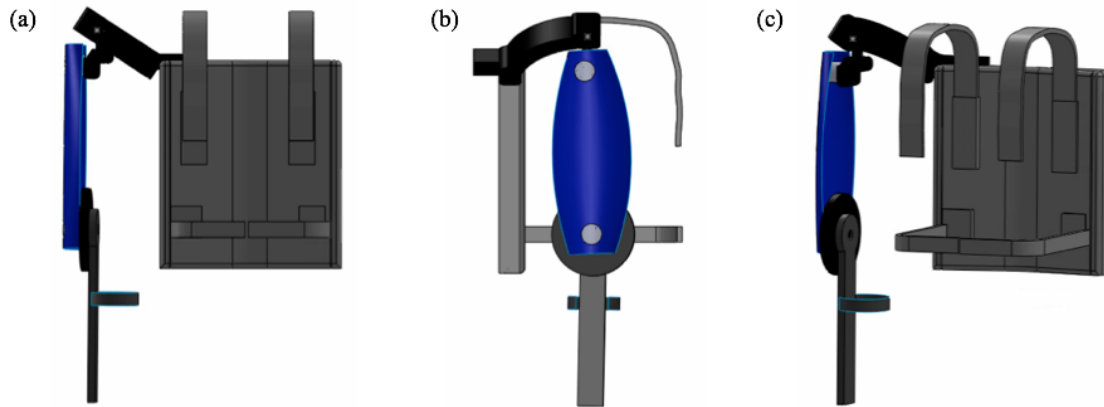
Exoskeleton in three views: (a) Front view (b) Right-side view (c) Perspective view.
